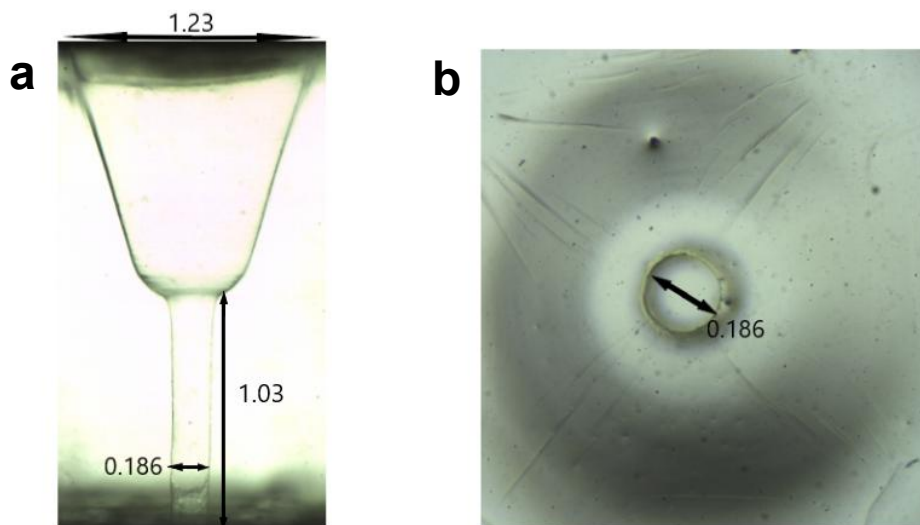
Side view (a) and outlet view (b) of Spray D nozzle made from acrylic, showing key dimensions in millimetres (mm).
